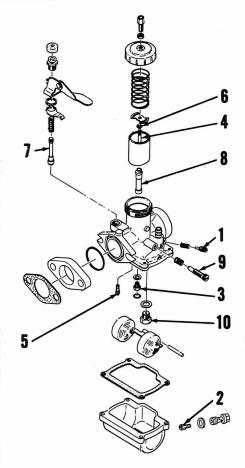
Exploded view of typical carburetor used on AT-1 and CT-1 models.
